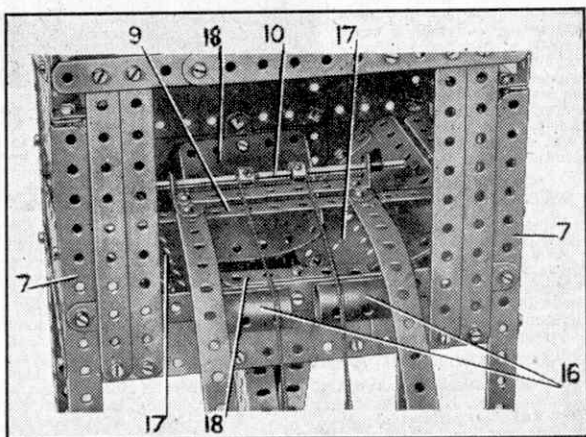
The hopper seen from the front, showing the Rod and Sleeve Pieces over which the carriage hoisting cords pass.
